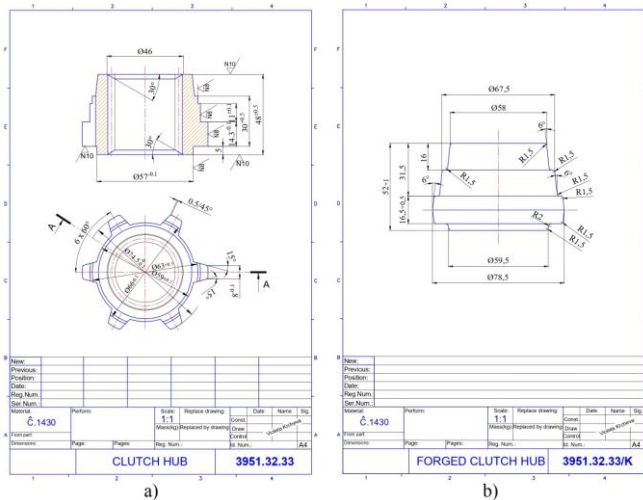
(a) Clutch hub, (b) Forged clutch hub
